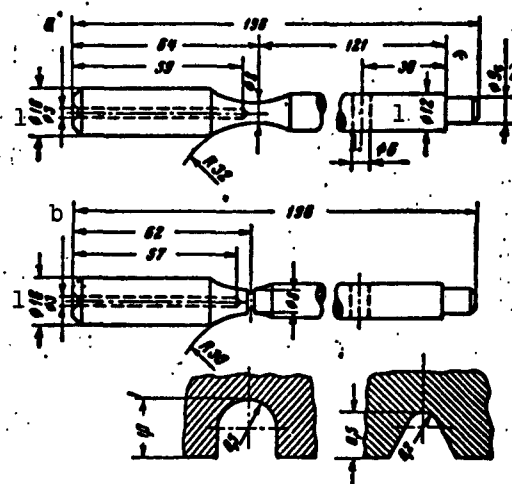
Specimens used for fatigue tests. a) Smooth; b) with circular notch.
